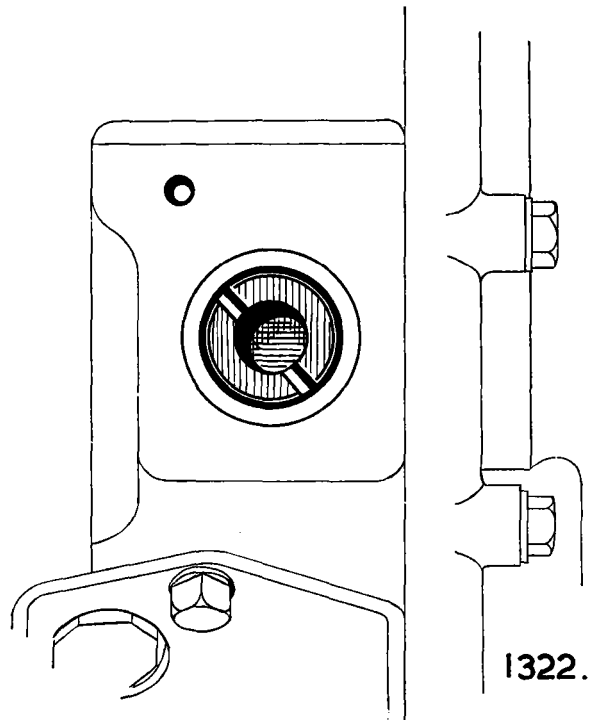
Showing the position of the distributor drive shaft offset when No. 6 (front) piston is on Top Dead Centre.
